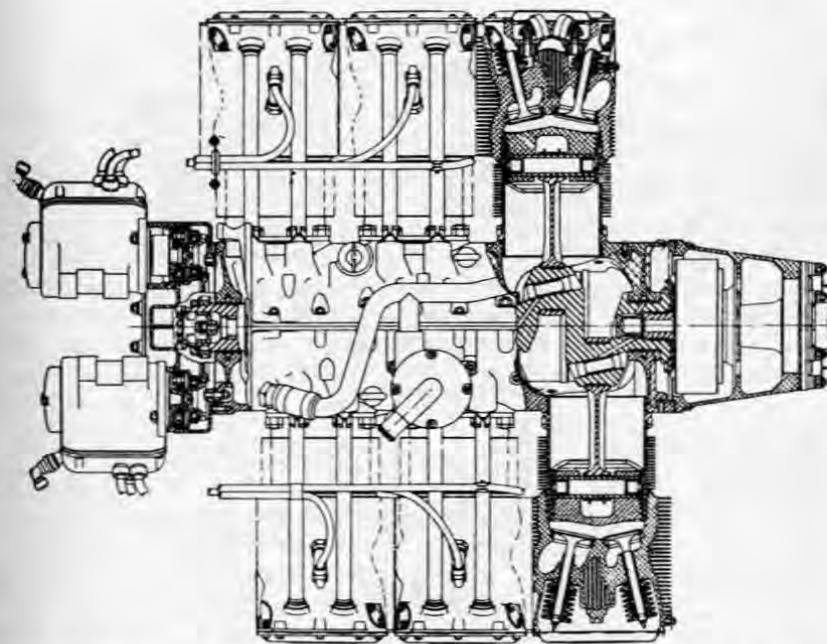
Longitudinal section of the Lycoming GO-435 aircraft engine. Bore 123.8 mm, stroke 98.4 mm, 260 b.h.p. at 3,400 rev/min.
